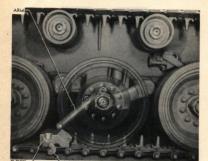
Track Wheel Lifter 41-L-1379 in Position To Lift Wheel
